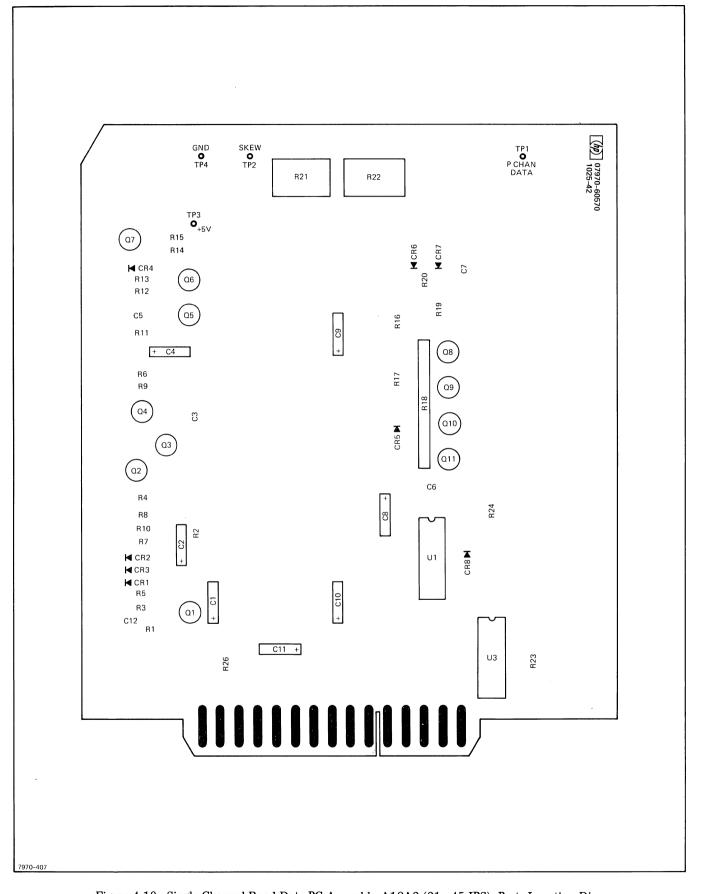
Single-Channel Read Data PC Assembly A18A2 (21 - 45 IPS), Parts Location Diagram
